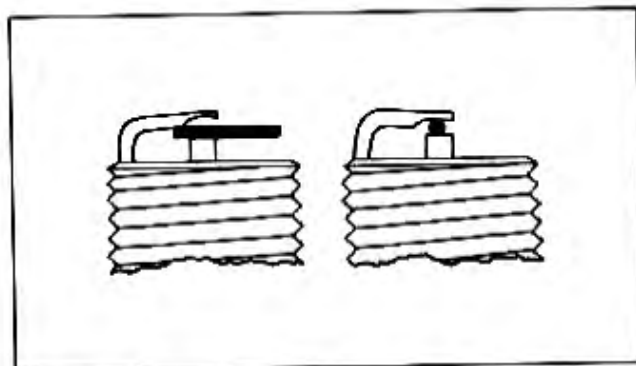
Flat Feeler Versus Round Wire Gauge for Measuring Spark Plug Gap
